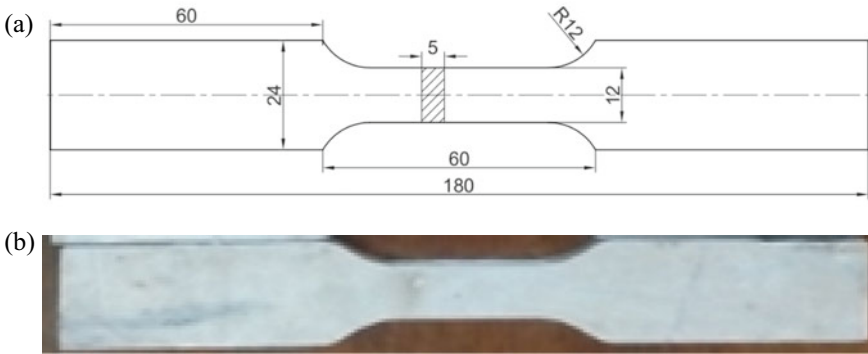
Detailed specifications (a) and photo of experimental tensile test samples (b)
